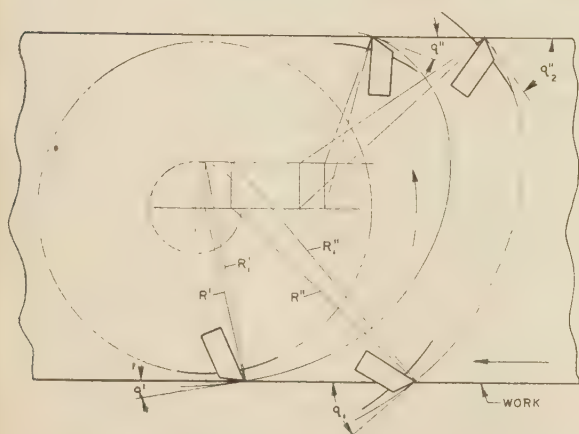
ANGLE OF APPROACH IN FACE MILLING
